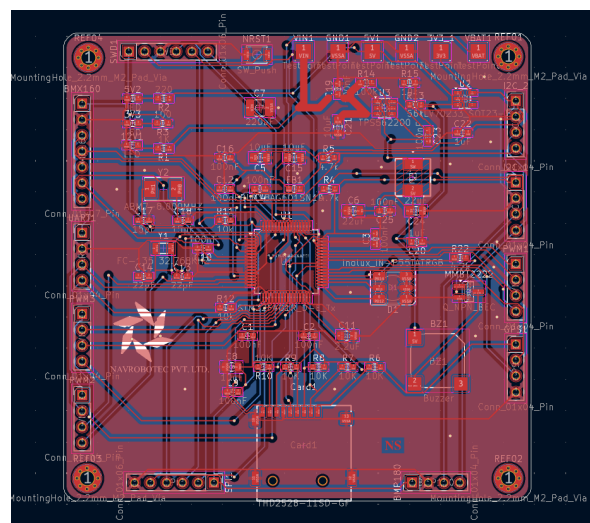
Detailed trace layout and routing of the Vayu flight controller PCB.
